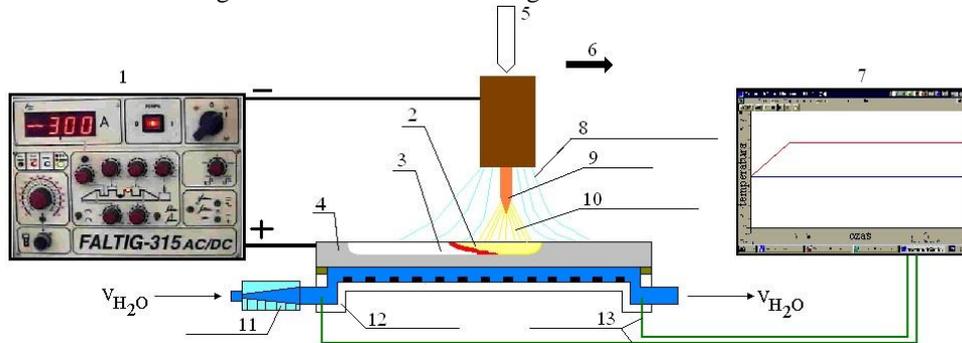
Schematic of the installation for melting and calorimetric studies (method GTAW: Gas-Tungsten-Arc-Welding): 1 - current source, 2 - liquid metal welding bath, 3 - melted layer, 4 - sample, 5 - protective gas, 6 - direction of arc movement, 7 - temperature gauge, 8 - protective atmosphere, 9 - electrode, 10 - electric arc, 11 - flow meter, 12 - calorimeter, 13 - thermocouple
